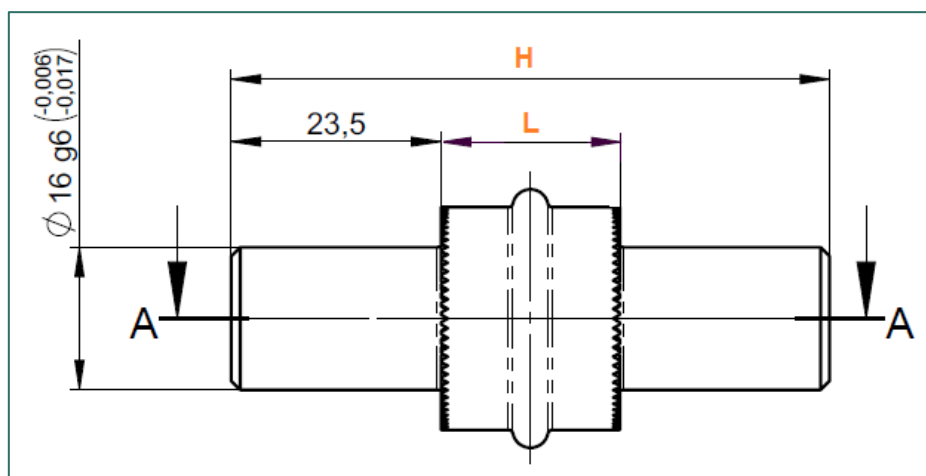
DIMENSIONS OF THE MUTARS® REDUCER
